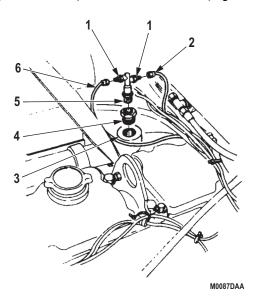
Ether Thermal Close Valve and Bushing Removal.
